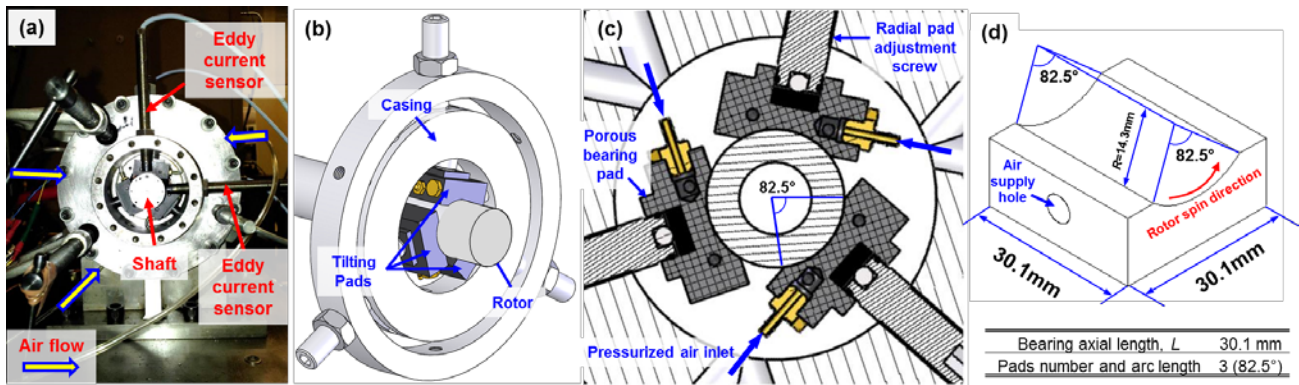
(a) Photograph of side view of test rig depicting an installed gas bearing, (b) isometric view of three-pad bearing supporting rotor, (c) cross section of three-pad porous bearing and air supply, and (d) dimensions of a bearing pad.
